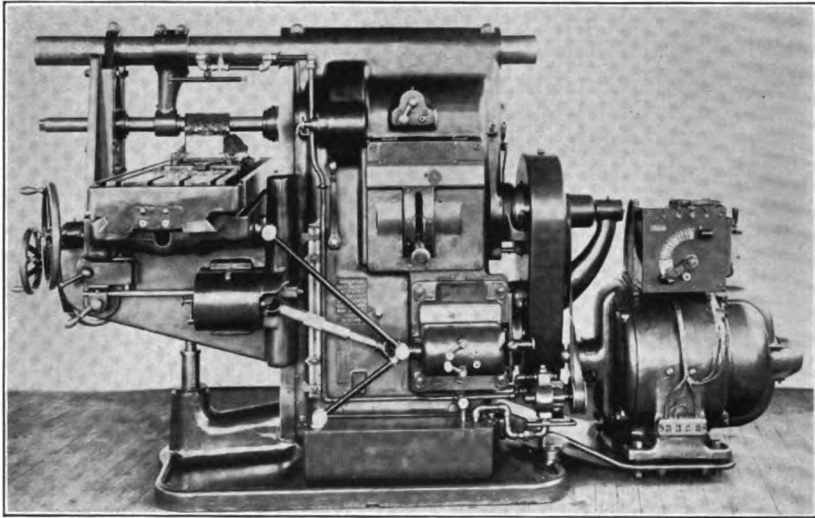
NO. 5 HEAVY PLAIN MILLING MACHINE. BROWN & SHARPE MFG. CO.
